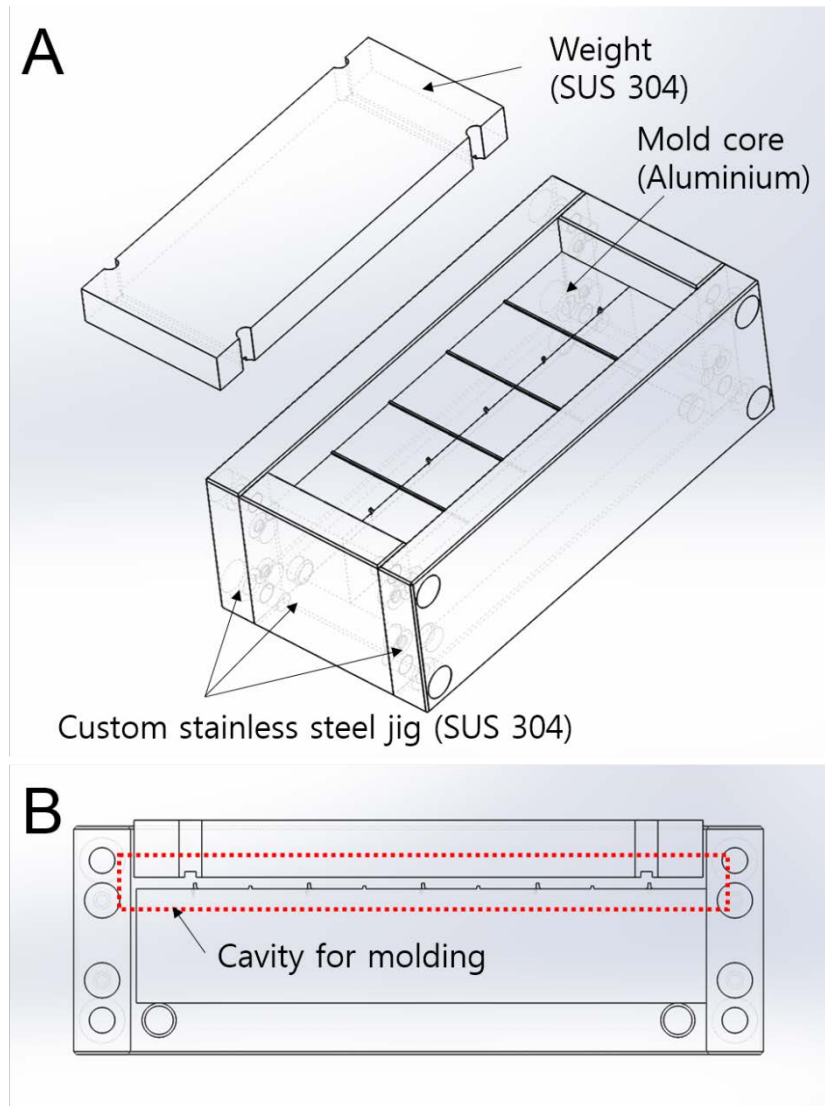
Assembled molds and jigs for simple molding (A) The weights and jig are made by machining the SUS 304 alloy. Material of mold core is aluminum alloy. (B) All parts are assembled, the resin can be put into the cavity and molded.
